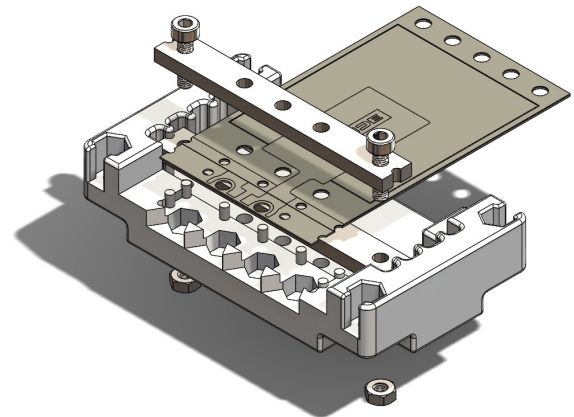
Clamping the piezo products is possible with two recessed nuts, two M3 12mm bolts, two PPA-5002 clamp bars and the PPA-5001 clamp base.
